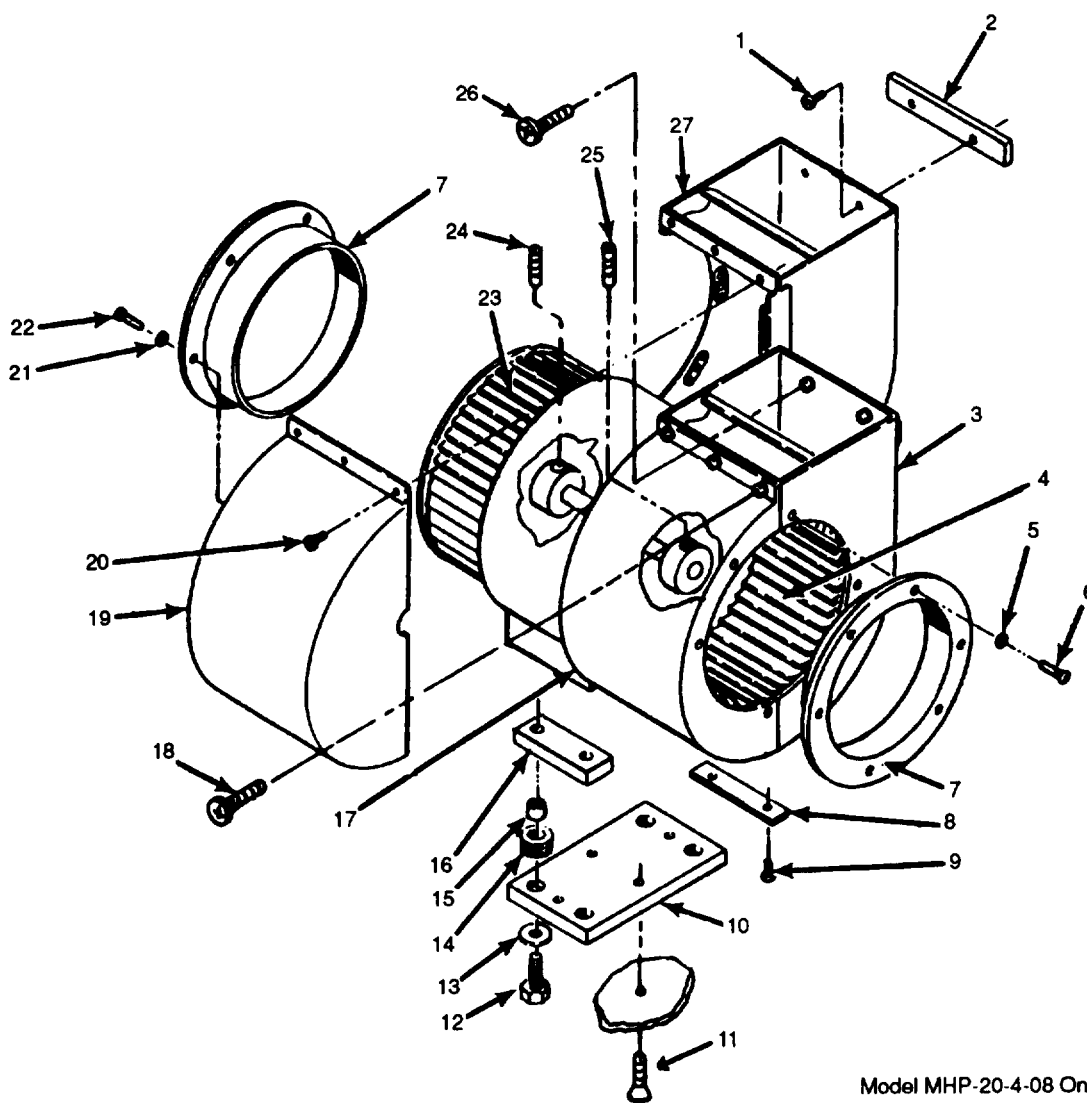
Evaporator Blower and Motor (Sheet 3 of 3)
